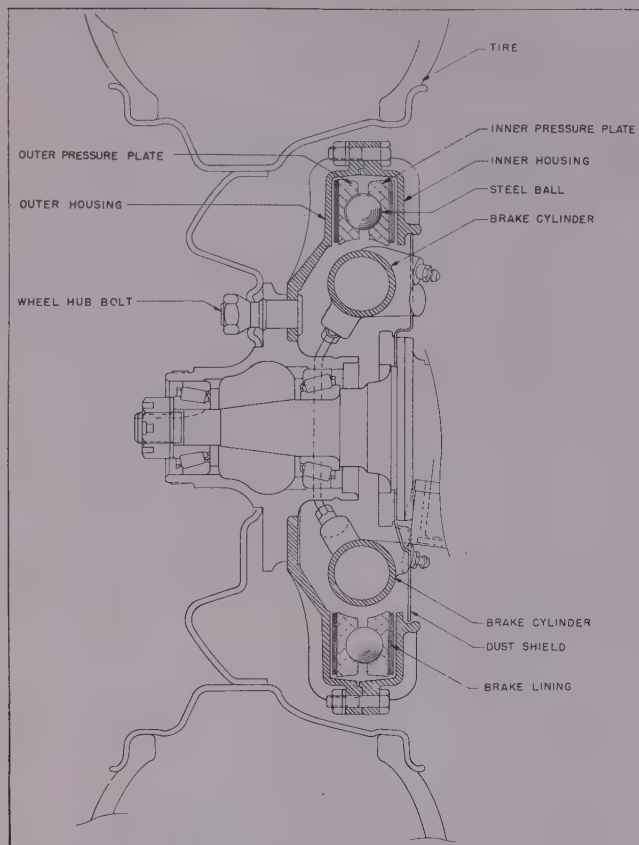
Chrysler disk brake, showing relative locations of components, assembled
